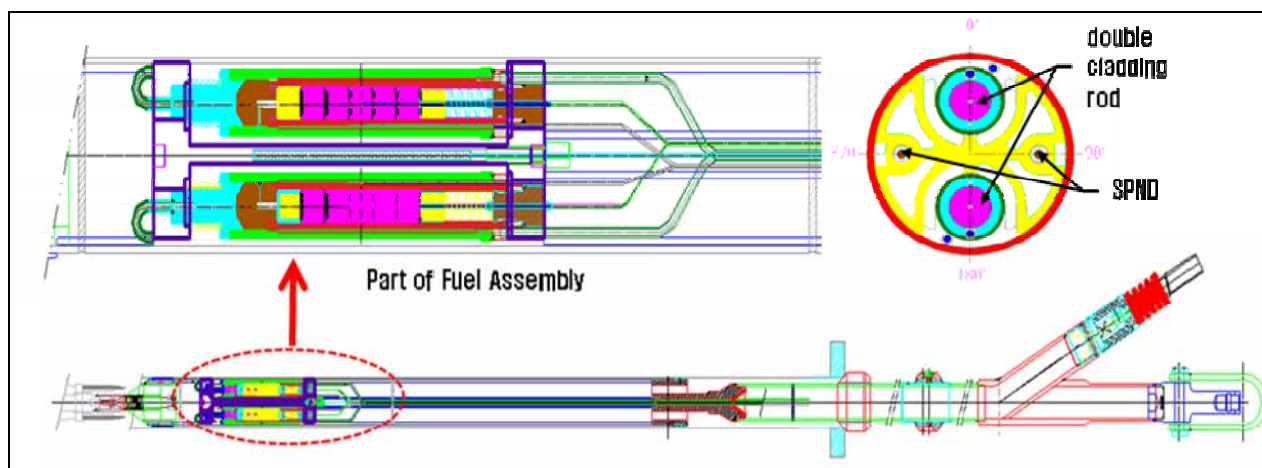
Drawings of the Instrumented Fuel Capsule(07F-06K) for an Irradiation test of the Double Cladding Instrumented Fuel Rods
